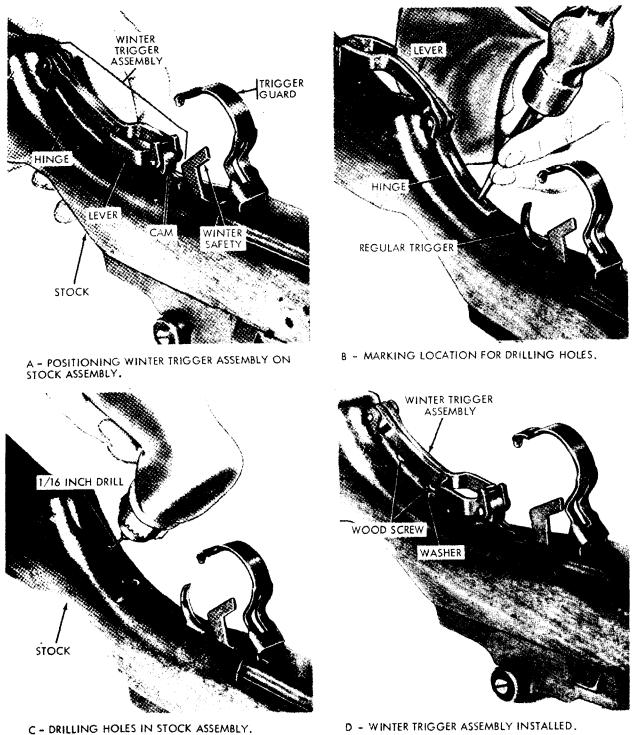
Procedures for installing winter trigger kit on stock assembly.
